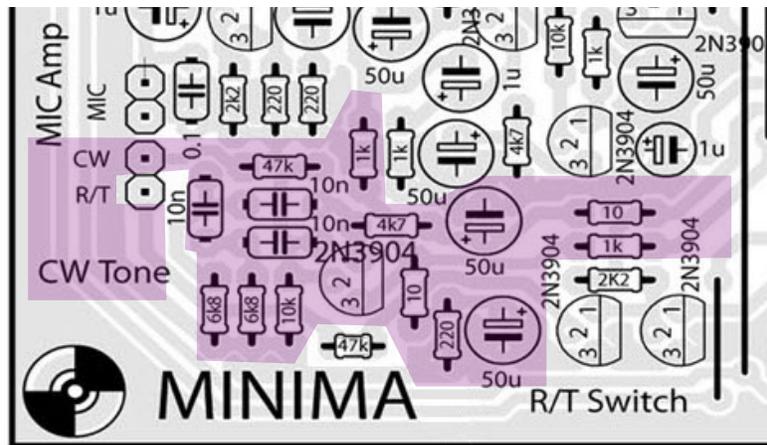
Layout of the Main Board CW Tone Oscillator circuitry.
